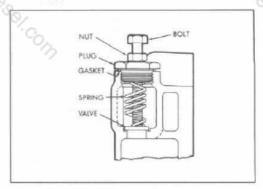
Bypass Valve with Modified Valve Plug Installed
